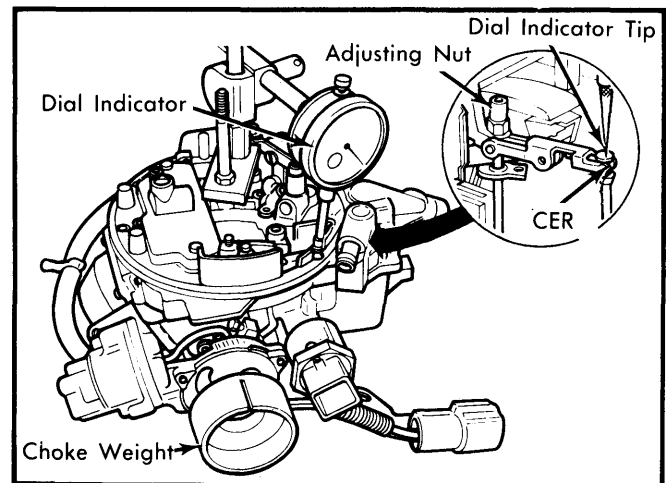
Cold Enrichment Rod (CER) Adjustment Set-Up Procedure
